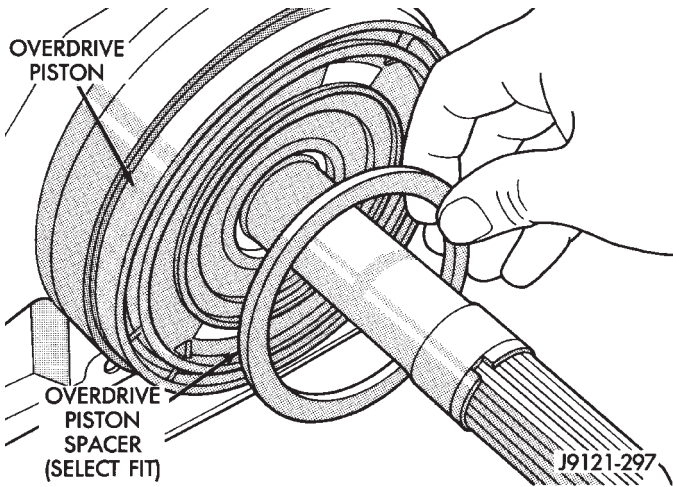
Overdrive Piston Thrust Plate Removal/ Installation
